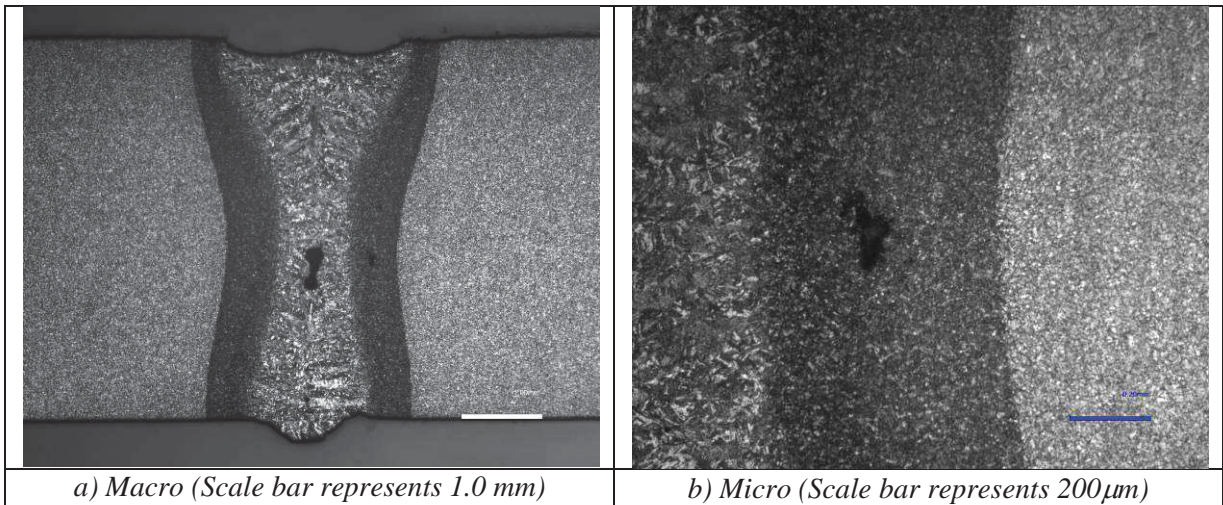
Welding condition of 4 kW and 29.2 mm/s (137 J/mm)
